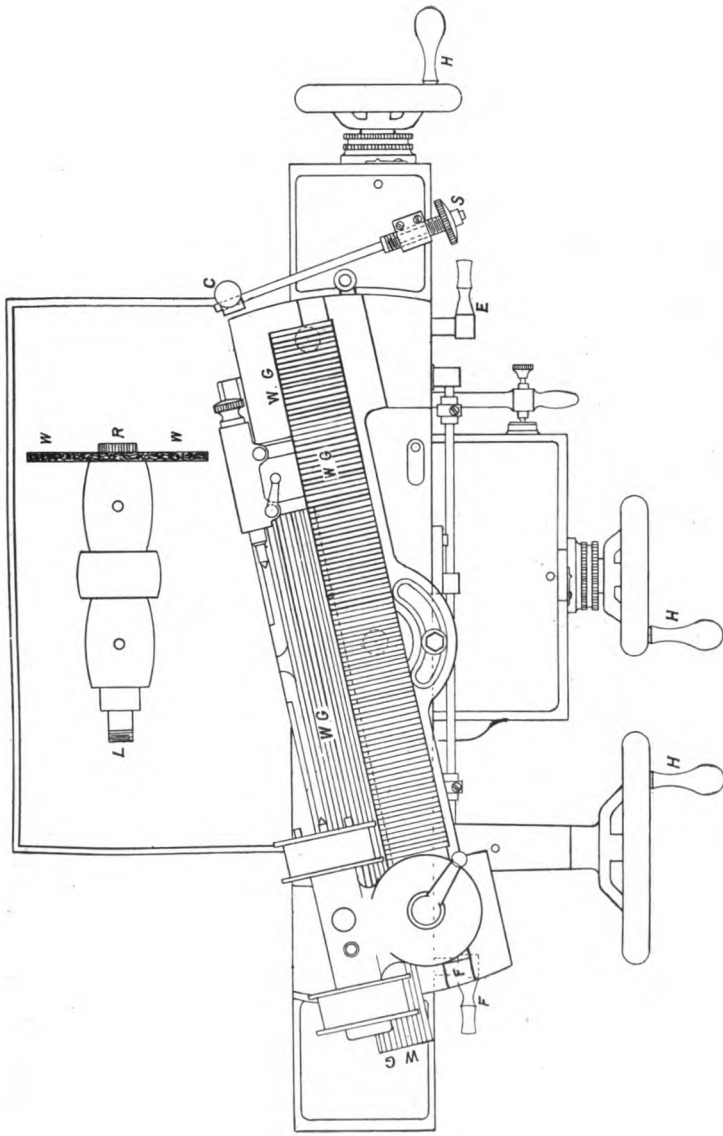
"Guest" Cutter Grinder. Diagram showing position of Head.
